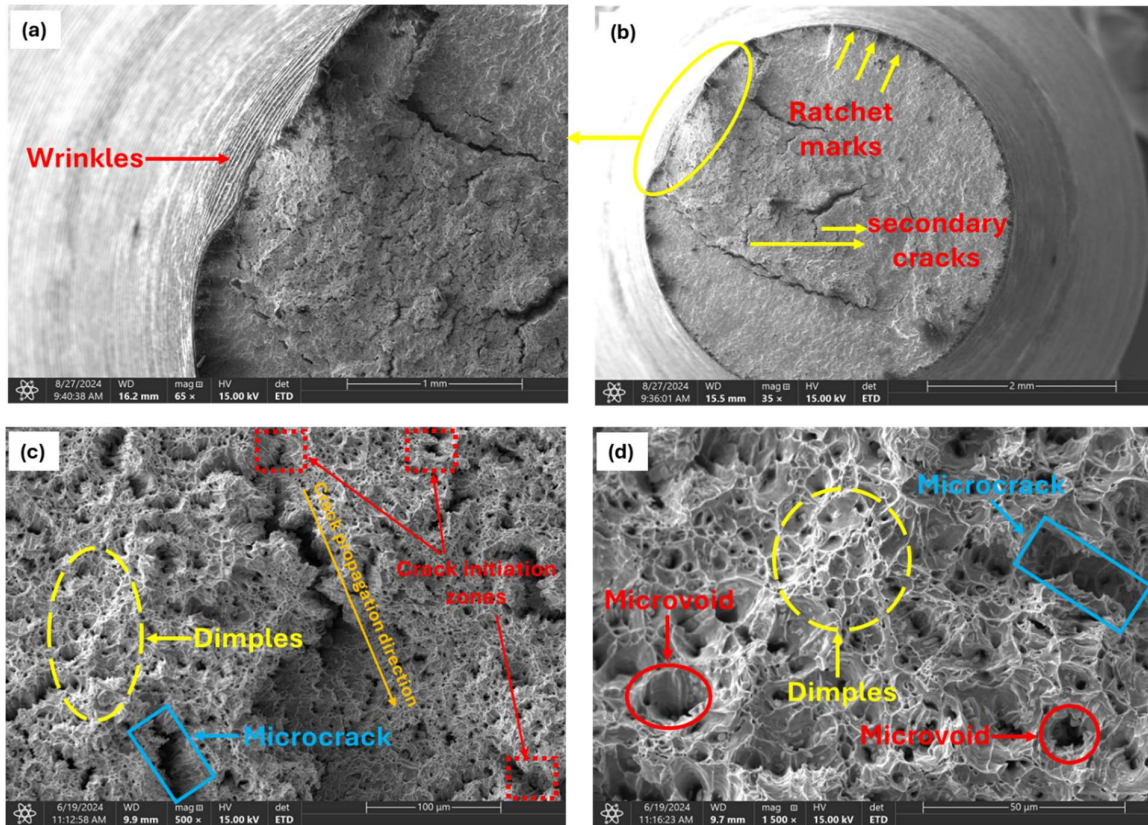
Fractographs of uncharged specimen showing ductile fracture characteristics. (a) Magnification of circled area in (b). (b) Low magnified (35X) view of fracture surface. (c) Magnified view (500X) of observed crack region in (b). (d) Magnified view of dimpled area in (c) (1500X).
